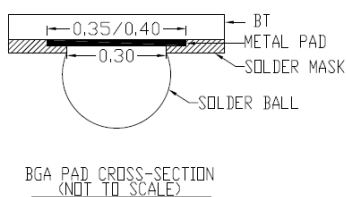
iNAND 8521 – Package Outline Drawing – BGA Pad View
